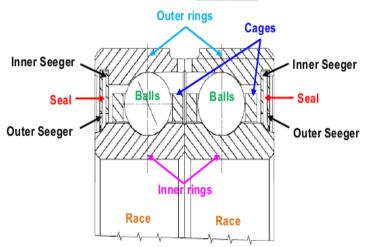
Drawing of the duplex bearing section, showing all its parts.
